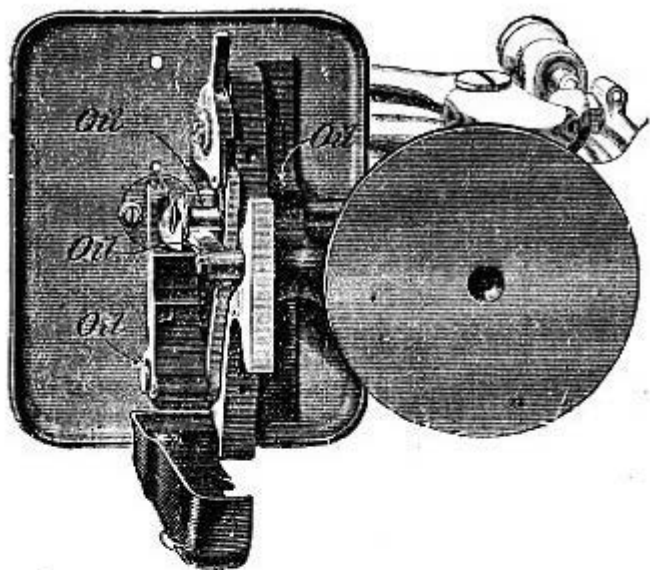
Showing places underneath Cloth Plate, where the Machine should be oiled occasionally, when it is removed from the Table, or Hand Appliance Base, to be cleaned (*this refers more particularly to the earlier machines without oilholes in Cloth Plate*).
